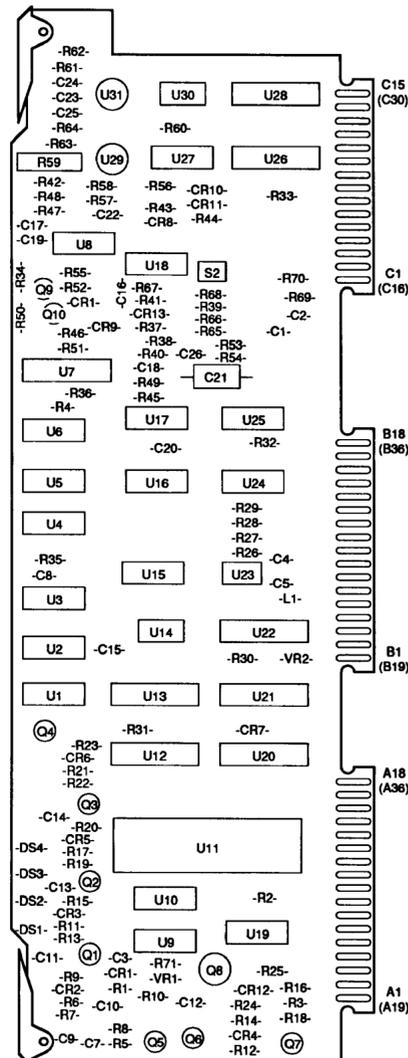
A2 Assembly Component Locator Diagram (Sheet 1 of 3).
